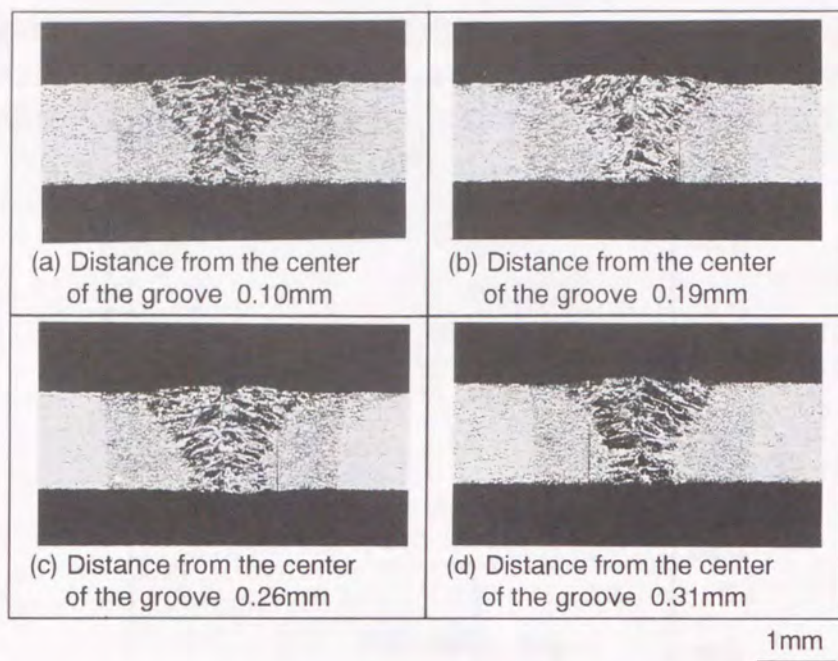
Transverse macrosection of weld metal (Sheet thickness 0.7mm)
